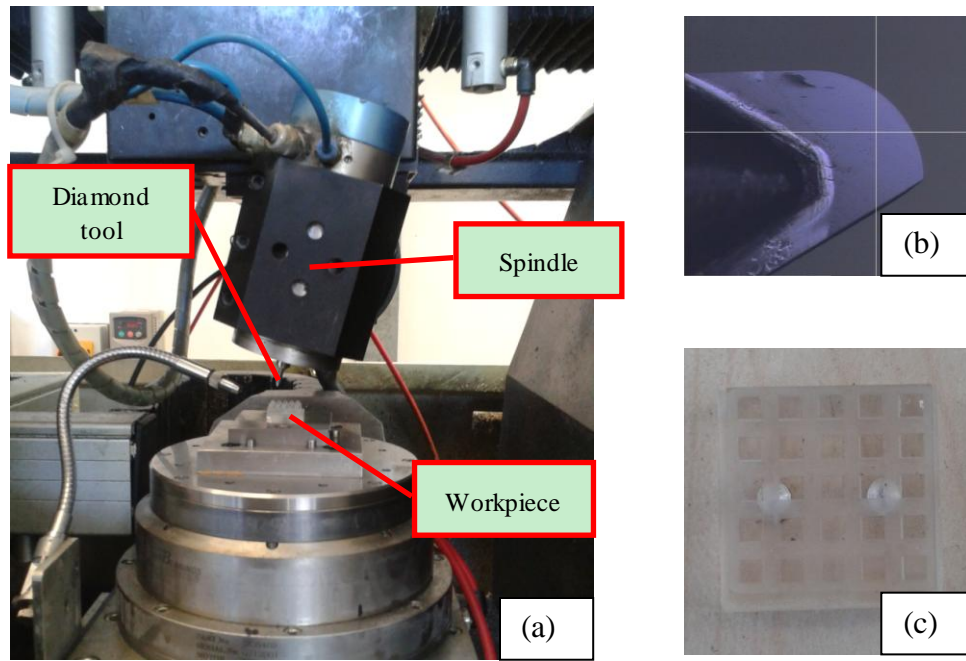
Experiment set-up (a) Machine set-up; (b) CVD tool; (c) Machined workpiece
